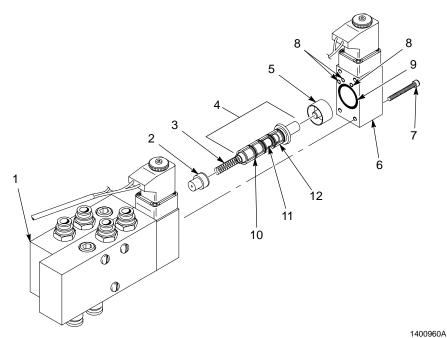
Valve Number 2 (F1/F2) Solenoid Valve Rebuild
